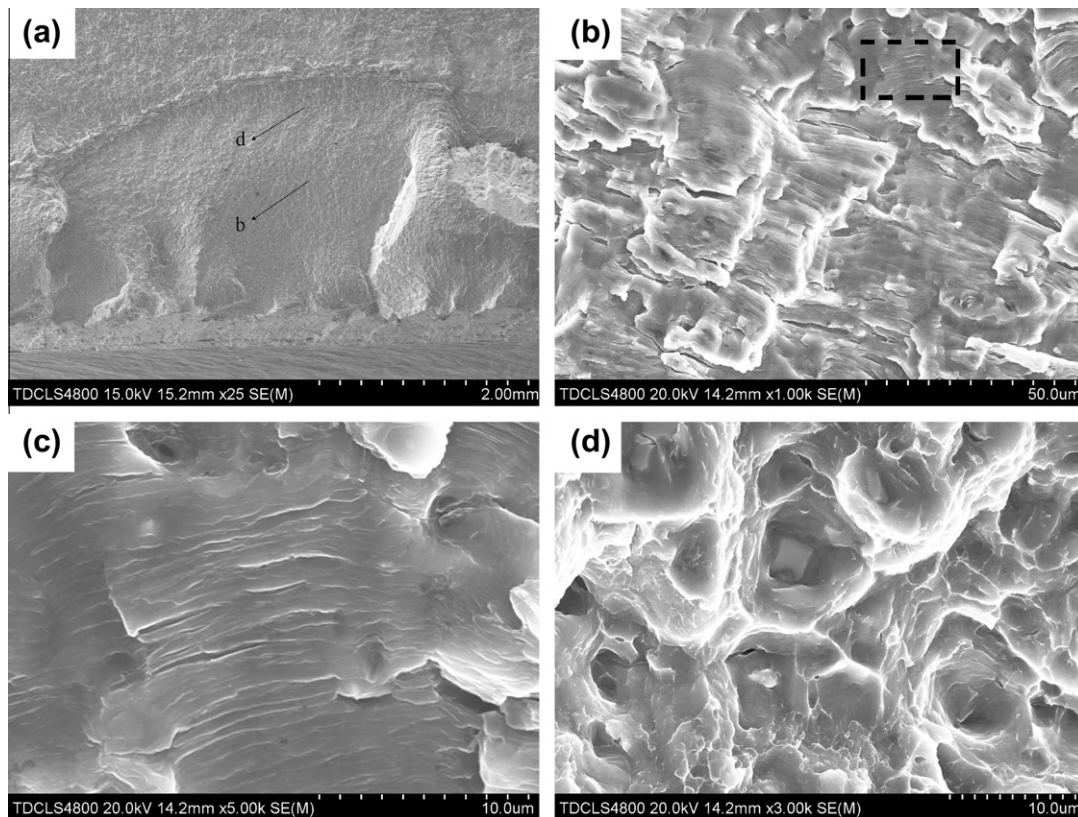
SEM images of fatigue fracture surfaces of the SPW specimen tested at 17 Mpa stress amplitude ($R = 0.5$): (a) overall view of the fracture surface at a lower magnification, (b) the fatigue crack propagation zone, (c) fatigue striations at a higher magnification of the dashed box in (b), (d) the final fracture region.
